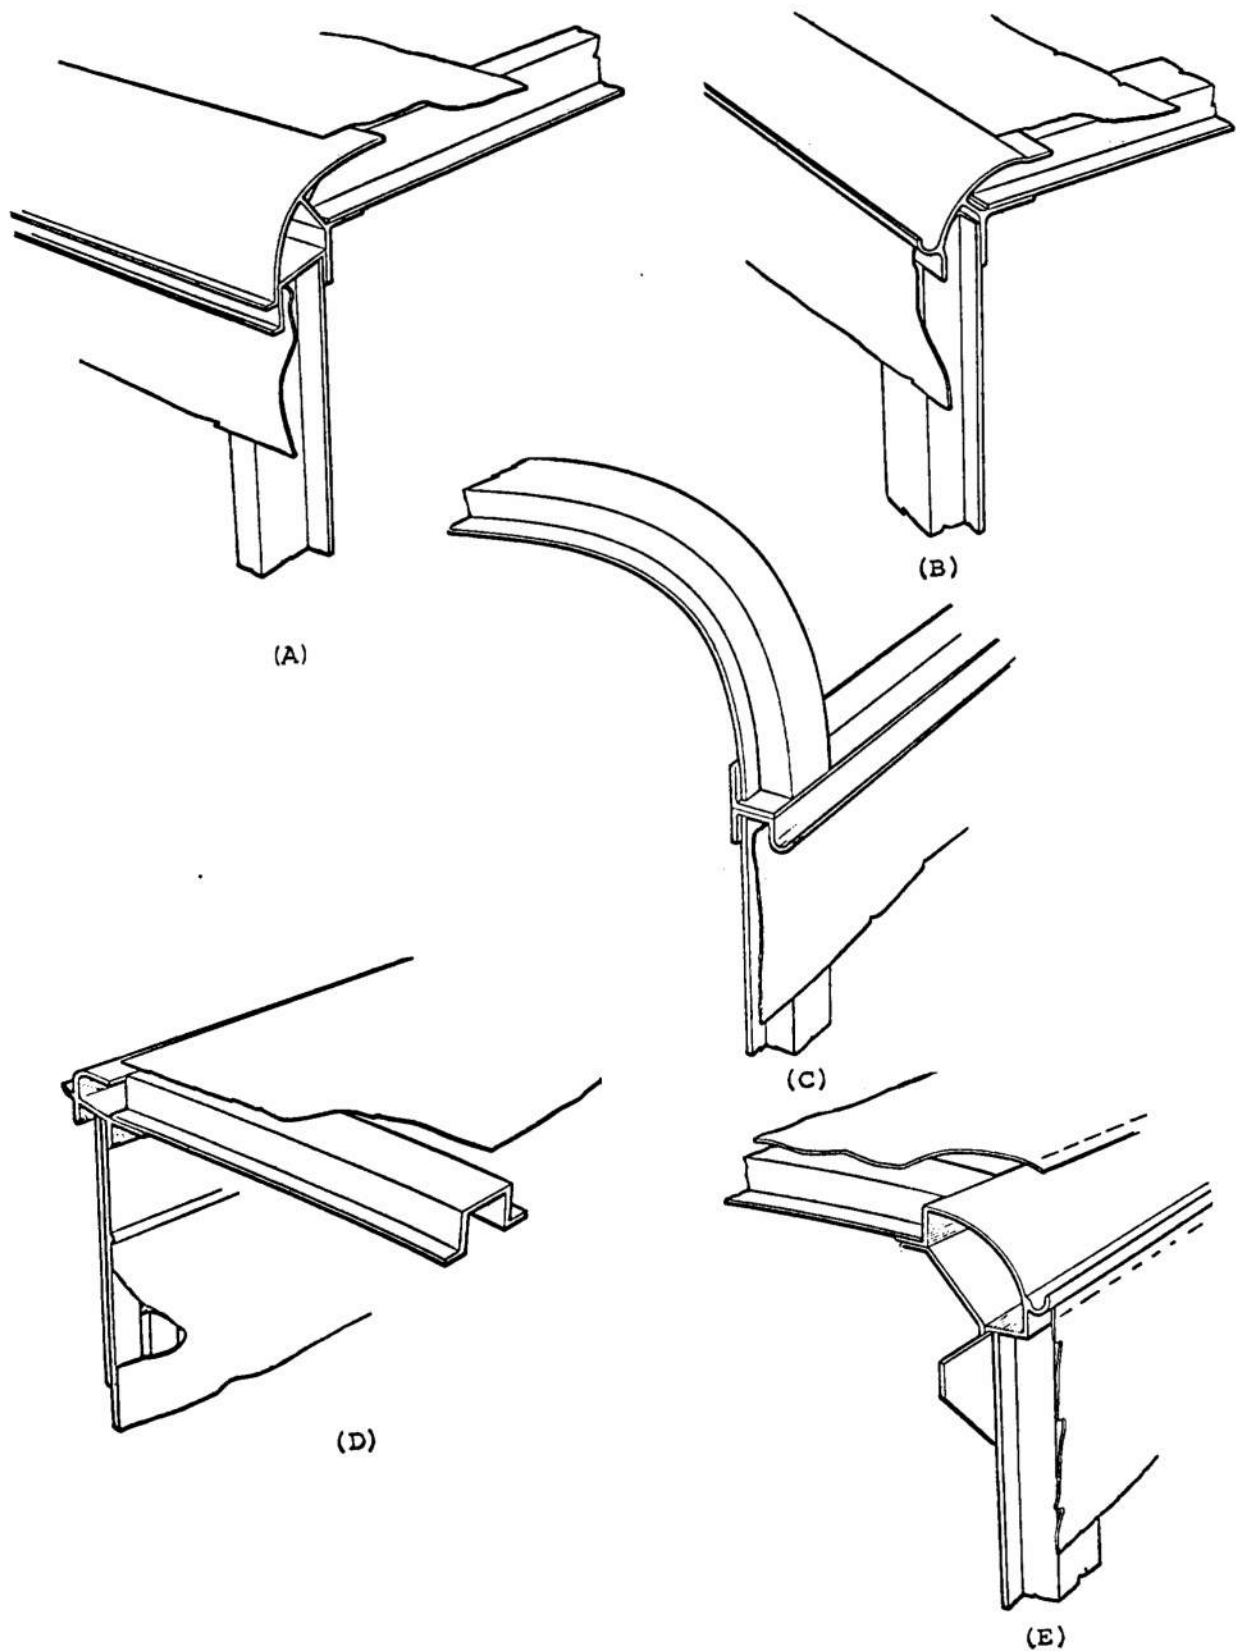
Typical Lightweight Roof Construction Details, Van Body<sup>106</sup>
